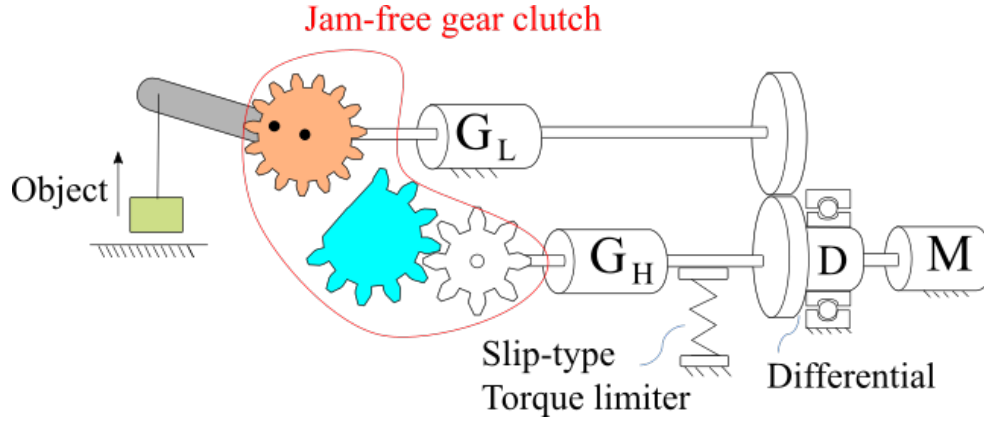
Actuation scheme of the robot joint LRT utilizing gear-clutch mechanism
